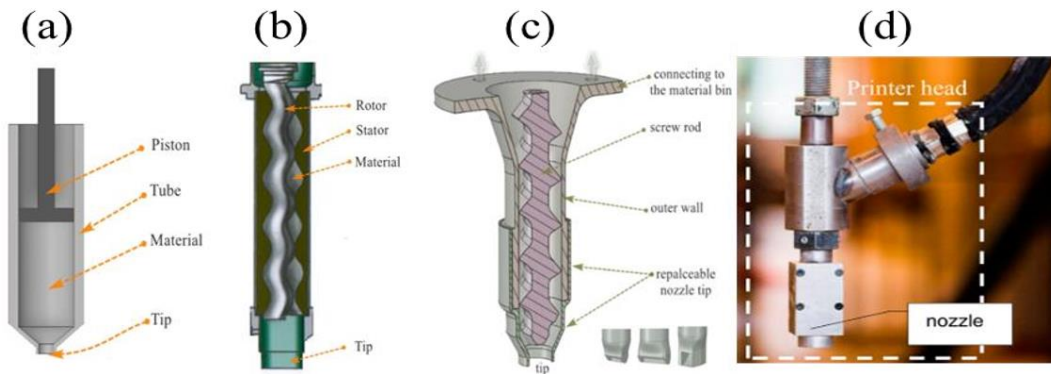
(a) Ram extrusion [21], (b) Screw pump [22], (c) Direct screw [23], (d) Pressure air nozzle head [16].
